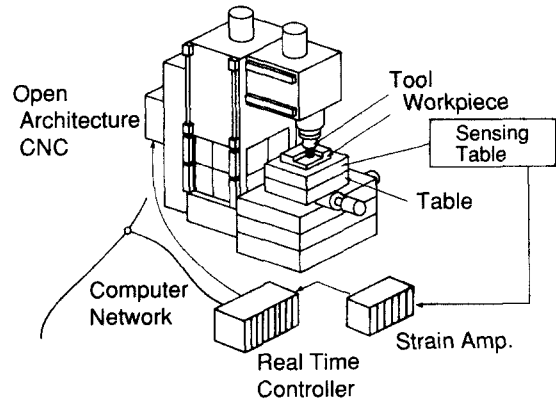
Machining system for remote manufacturing⁽²⁶⁾
